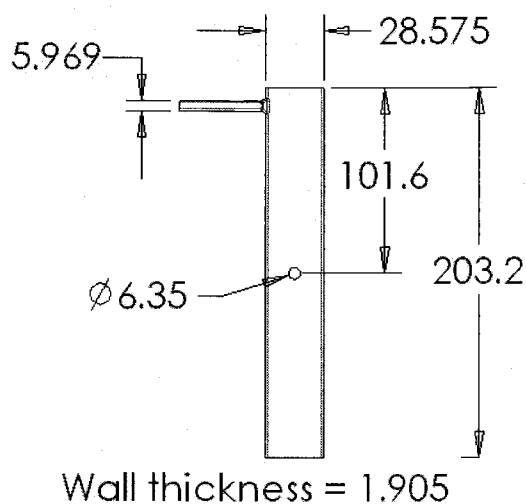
Quartz Chamber Dimensions. All dimensions in mm.
